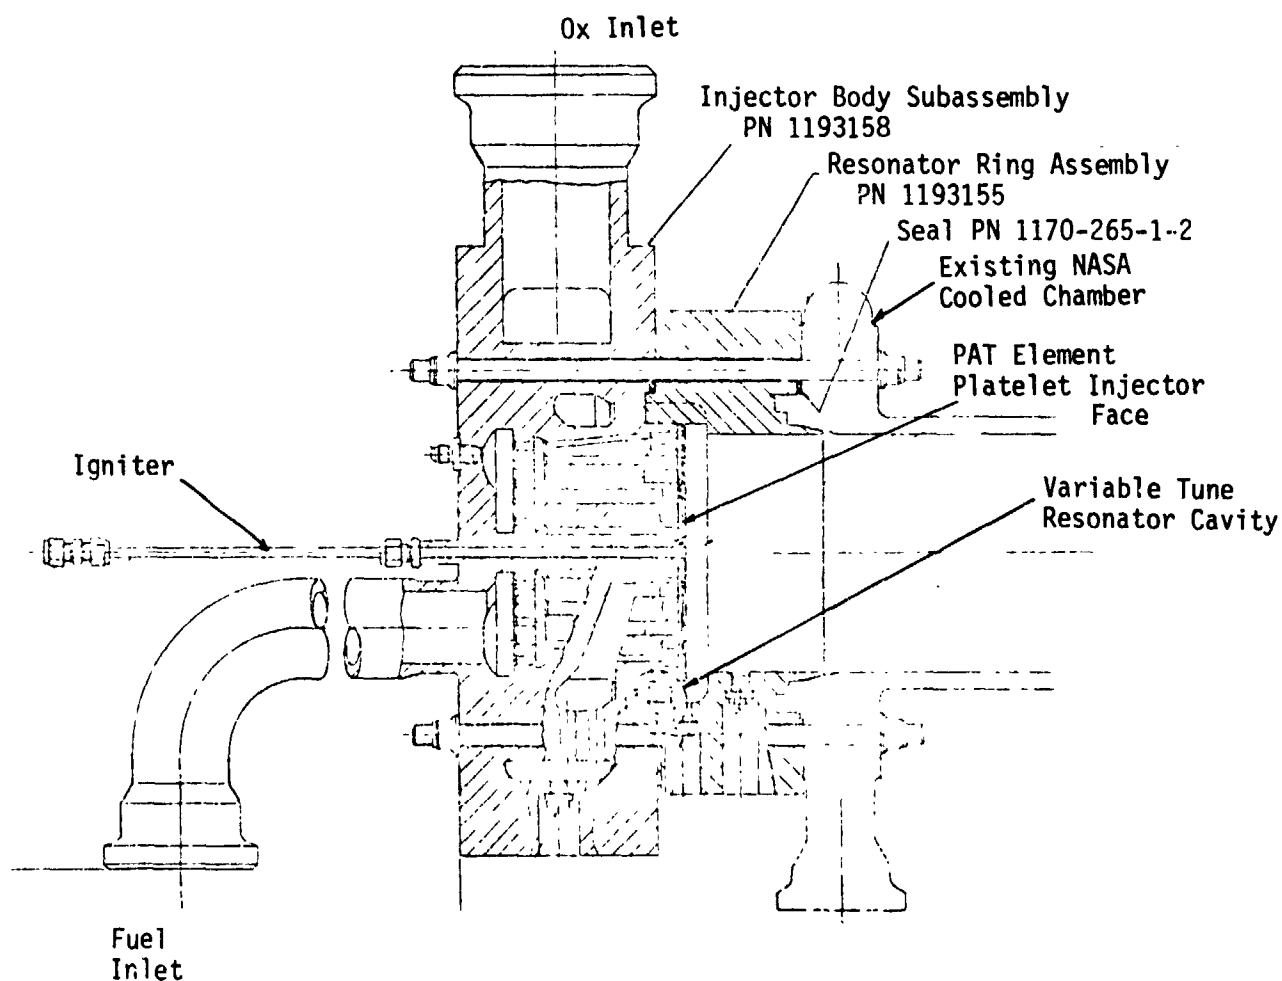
LOX/RP-1 Injector Assembly PN 1193106
